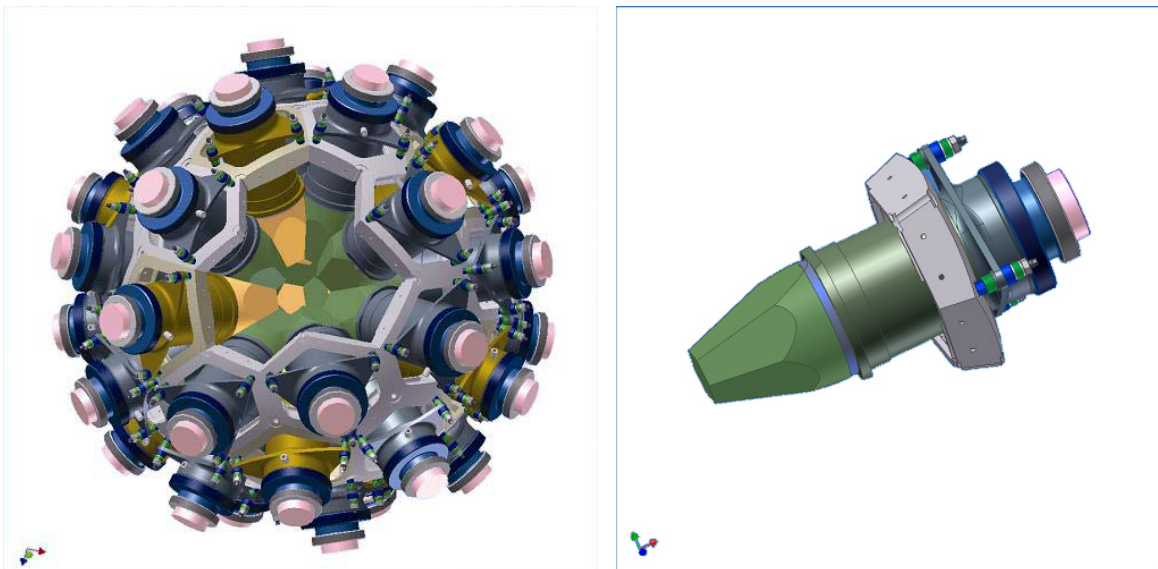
Left: CAD drawing of the complete TAC assembly. Right: CAD drawing of an hexagonal module with housing, support and photomultiplier housing.
